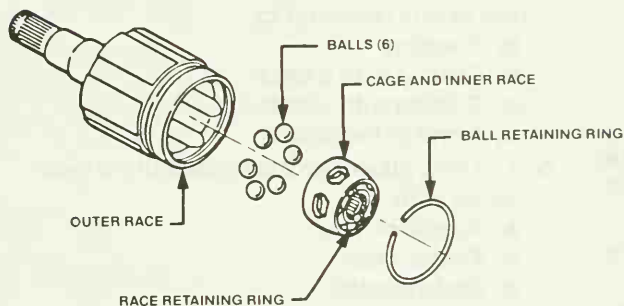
The joint is disassembled after removing the ball retaining ring. (Chevrolet Motor Division of General Motors Corporation)
